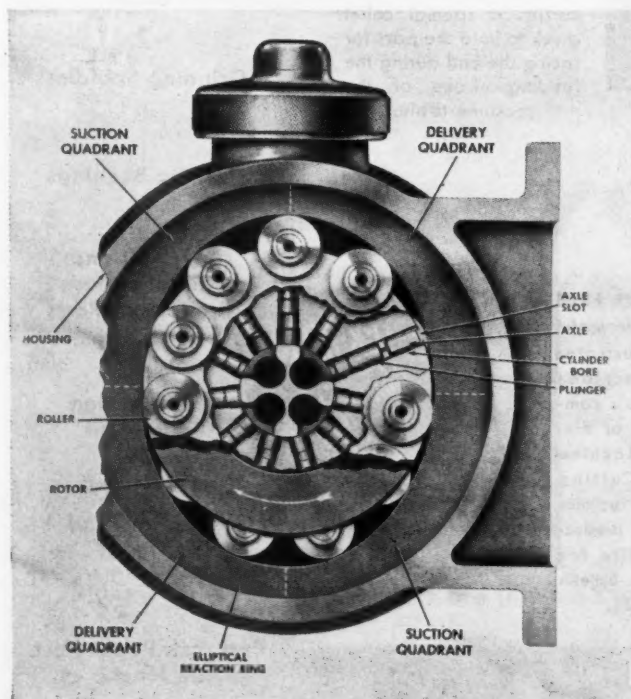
Cross-sectional View of Superdrdraulic Pump Rotor Assembly
